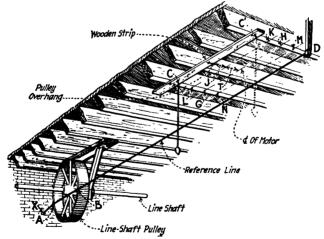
Measurement method of aligning a motor on the ceiling.
